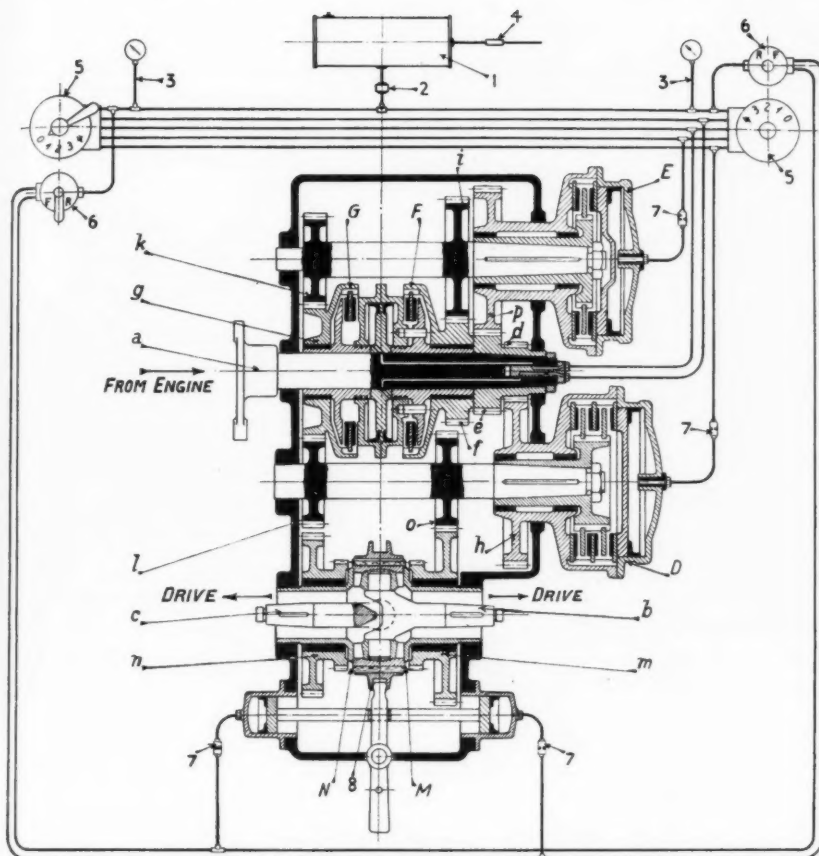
(left): Diagrammatic section of T.A.G. gearbox
